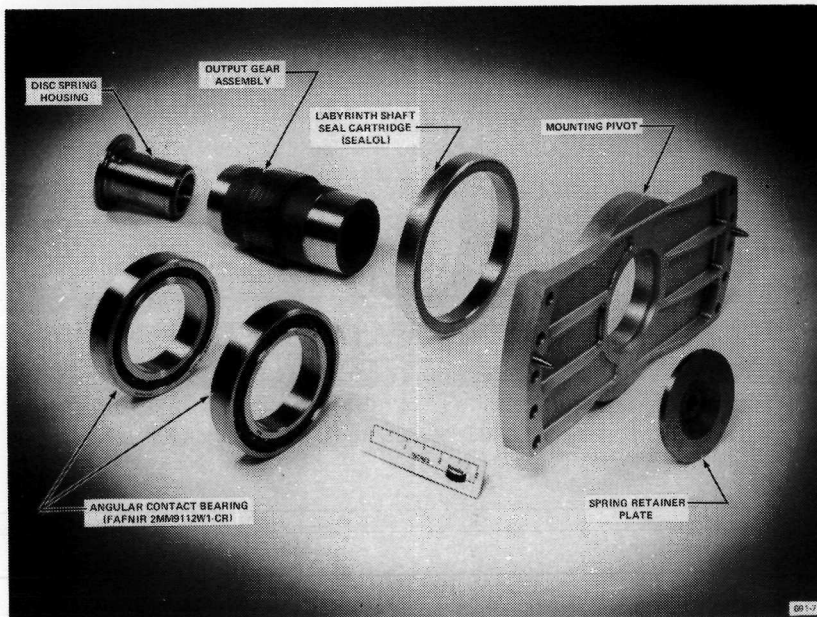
Exploded View of Output Shaft, Mounting Pivot, and Bearing Preload Assembly
